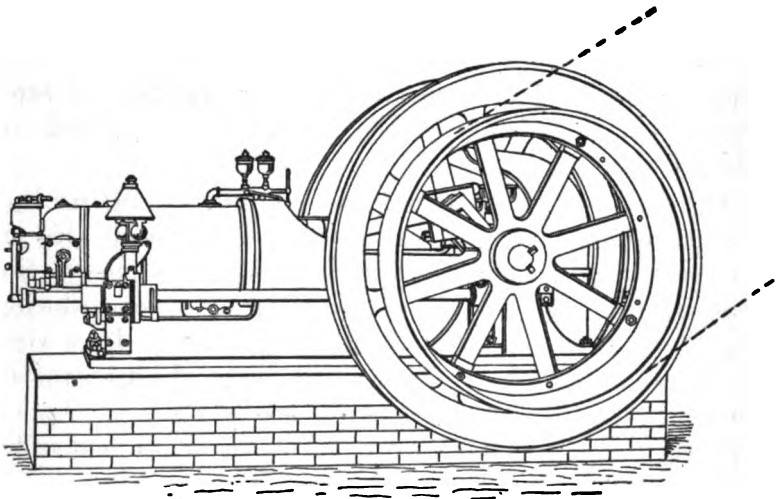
50 HORSE-POWER OTTO ENGINE.
